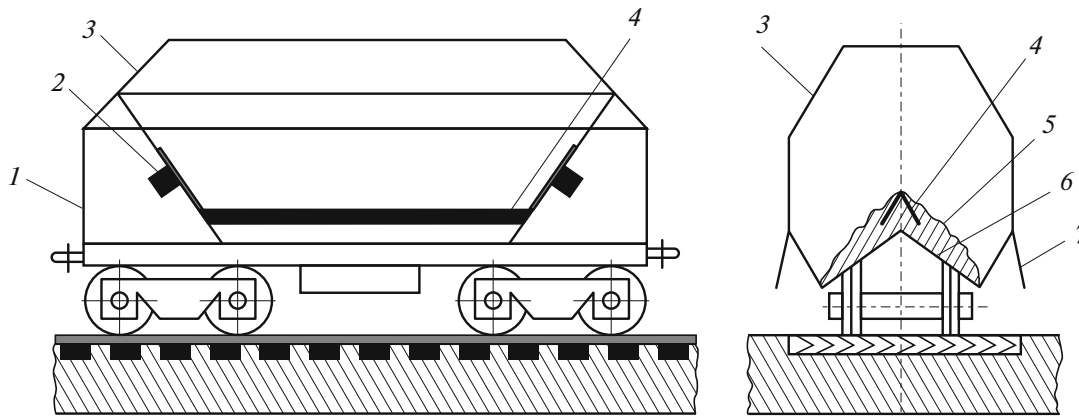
Layout of an upgraded hopper car: (1) the body; (2) the vibrator; (3) the bunker; (4) the vibrating beam (vibrating batter board); (5) sinter arching; (6) the ridge beam; (7) the unloading hatch.
